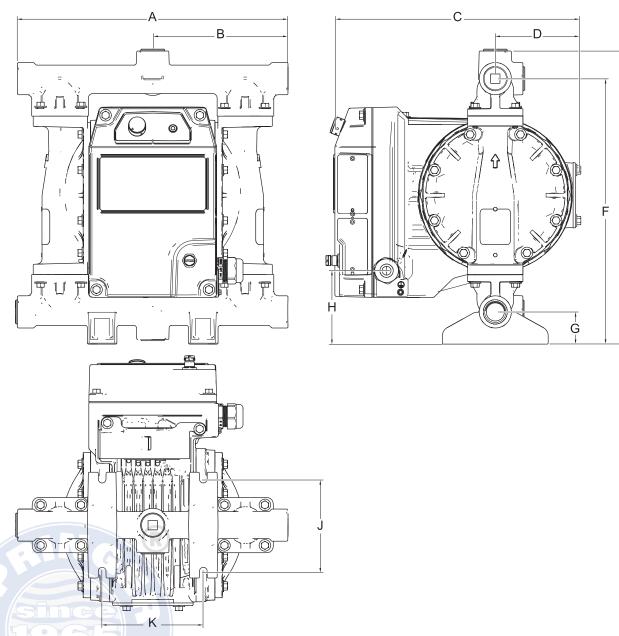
Dimension Diagram for i30 (QTC) with Metal Wetted Section
